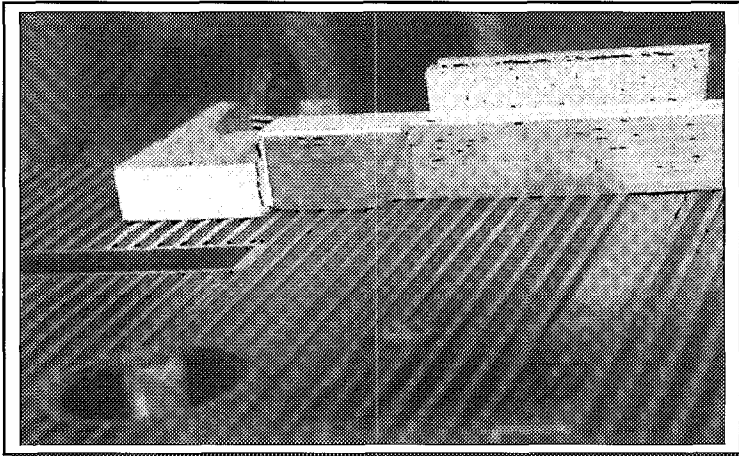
Router table, showing sandpaper facing on block screwed into miter gauge.
